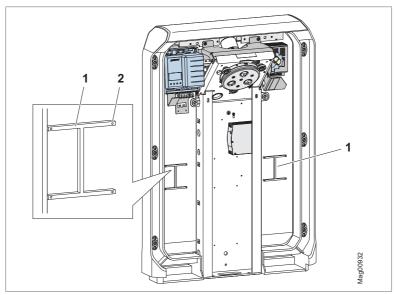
Rear panel mounting options – mTripod FMTP-MS only
